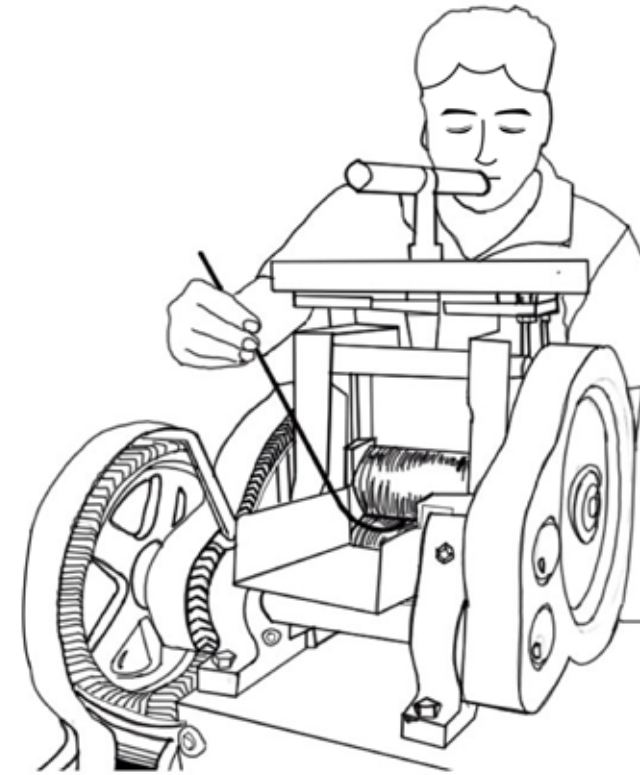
Sketch of a labourer drawing wire through the wire drawing machine
